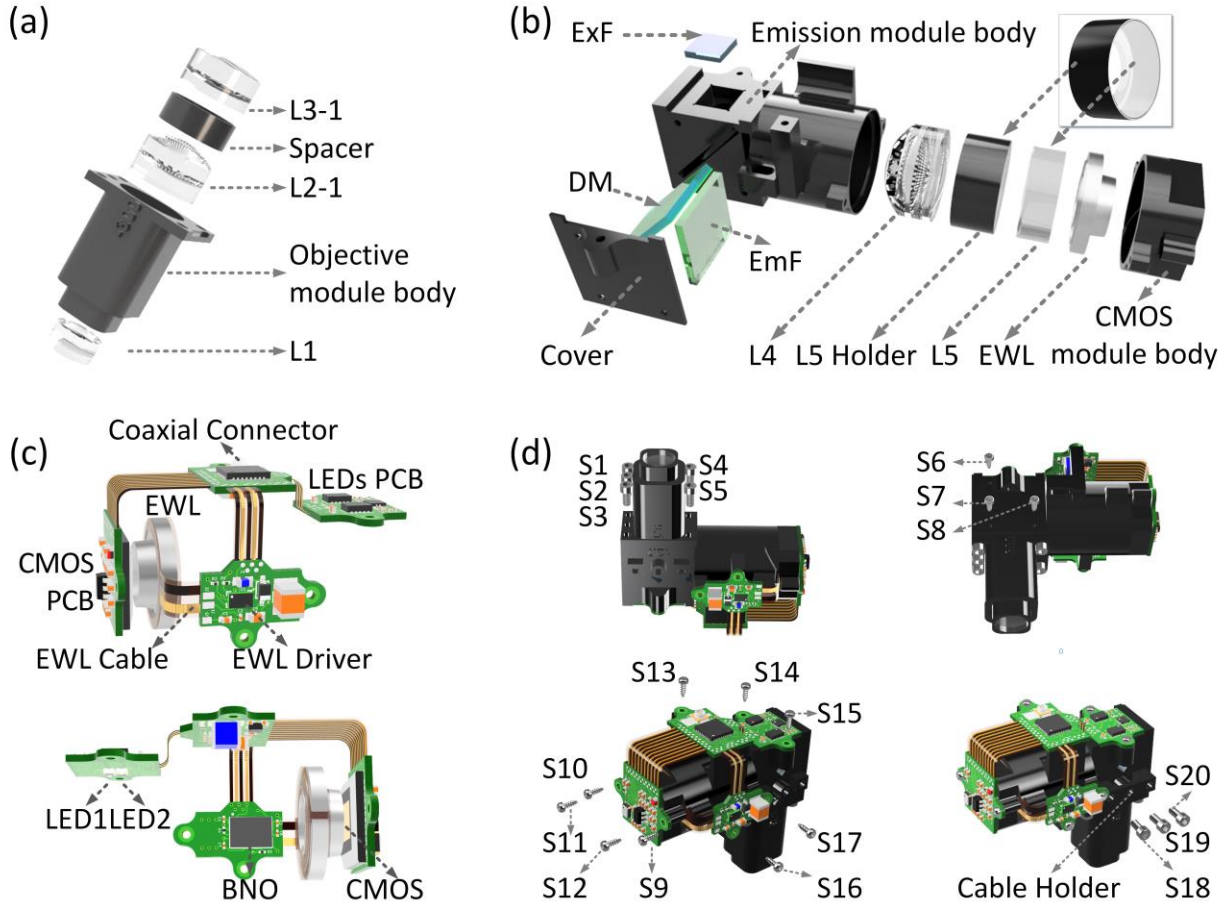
Mechanical and optical assembly of MiniLFOV. The MiniLFOV consists of three main modules, objective module (details in a), emission module (details in b), sensor module, and a custom Rigid-Flex printed circuit board (PCB) (details in c), and they are screwed together with two types of screws (details in d). Objective module (1.8-mm WD) contains three achromatic lenses (L1, L2-1, and L3-1) with a spacer (3.5-mm tall) placed between L2-1 and L3-1, with a 3D printed objective module body to hold the components. 3.5-mm-WD objective module contains three achromatic lenses (L1, L2-2, and L3-2) with a spacer (2-mm tall) placed between L1 and L2-2. Emission module contains filters (excitation filter “ExF”, dichroic mirror “DM”, and emission filter “EmF”), and optics lenses (achromatic L4 and plane-concave lens L5), with a 3D printed emission module body to hold the filters and lenses. Sensor module holds the EWL with a 3D printed CMOS module body. The circuit module consists of 4 sub-circuits, an excitation LED circuit, an electrowetting lens tuning and head orientation circuit, a CMOS image sensor circuit for collecting Ca^{2+} imaging data, and a power-over-coax and serializer circuit (Fig. 1a, b) for supporting coaxial cable power and data transmission. Two LEDs are housed on the LED circuit board driven by two LED drivers with I²C digital potentiometer for brightness adjustment. Electrowetting lens tuning and head orientation circuit consists of EWL driver, with EWL cable holding the EWL, to adjust the focus of the EWL and the absolute-orientation chip for collecting head orientation data. 5M CMOS sensor (MT9P031) is housed on the CMOS image sensor circuit for Ca^{2+} fluorescence image capturing. A serializer chip on the power-over-coax and serializer circuit serializes the imaging data and sends it over a coaxial connector to communicate with a
